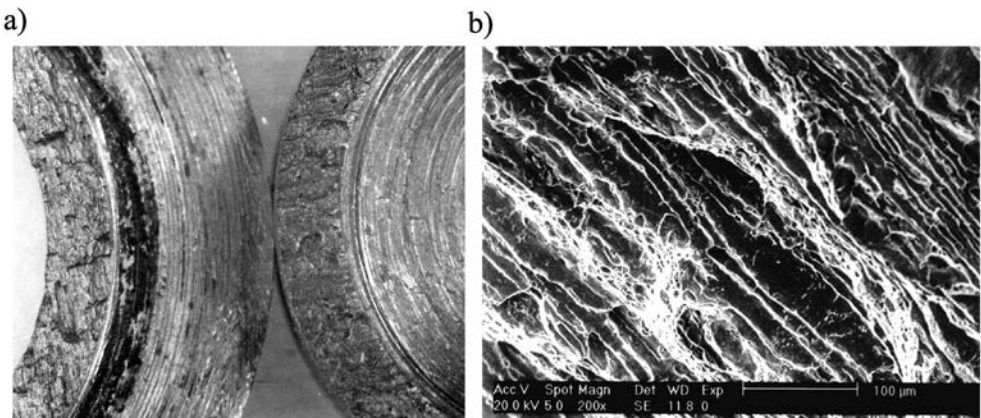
The ram tensile test specimen fracture (a) and characteristic fracture of the 15G2ANb steel layer of a clad plate, SEM (b).
